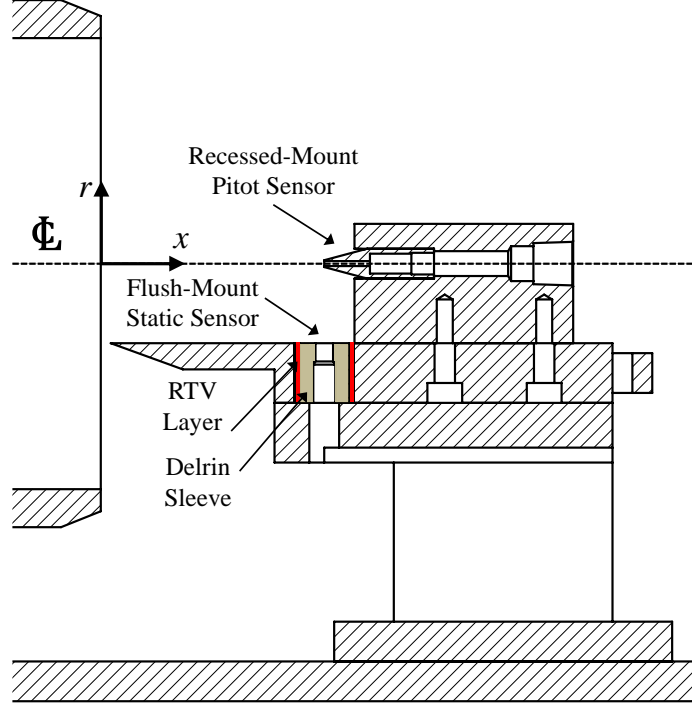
Schematic of assembly used to simultaneously measure pitot and static pressure with modified static sensor mounting.
